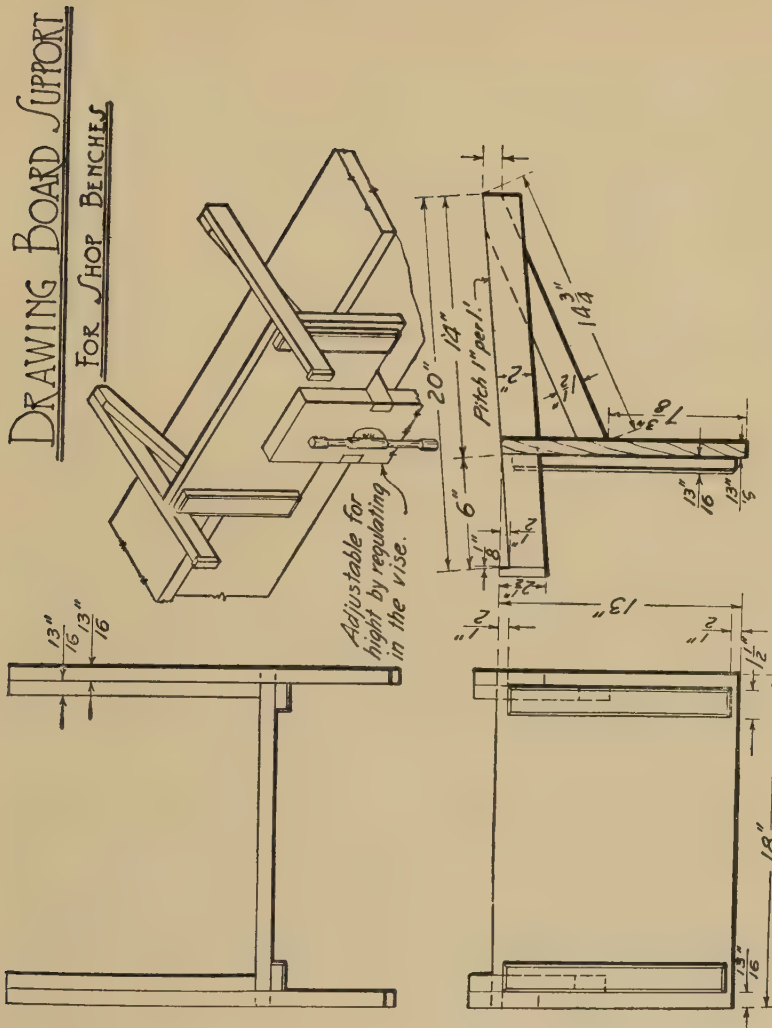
DRAWING-BOARD SUPPORT FOR SHOP BENCHES
